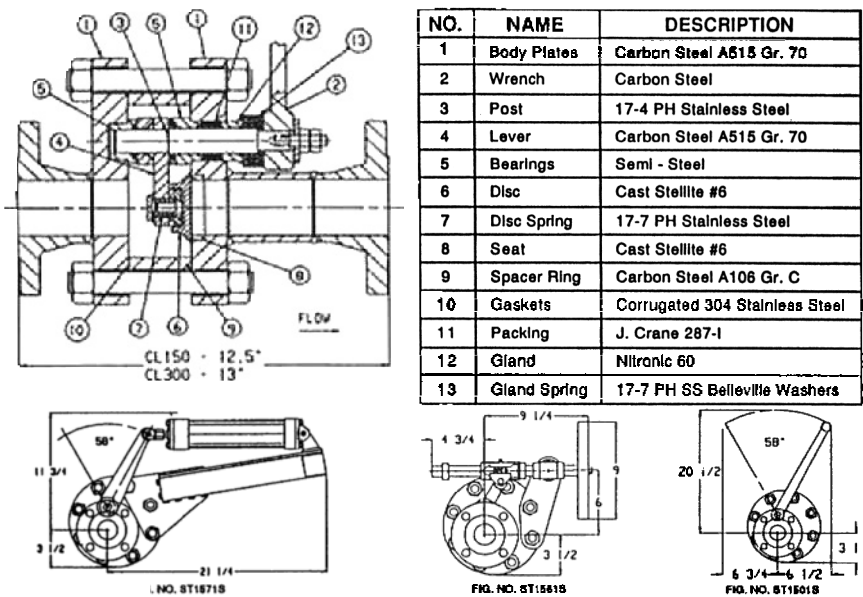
Rotating-disc valve (Everlasting Valve Co.).
